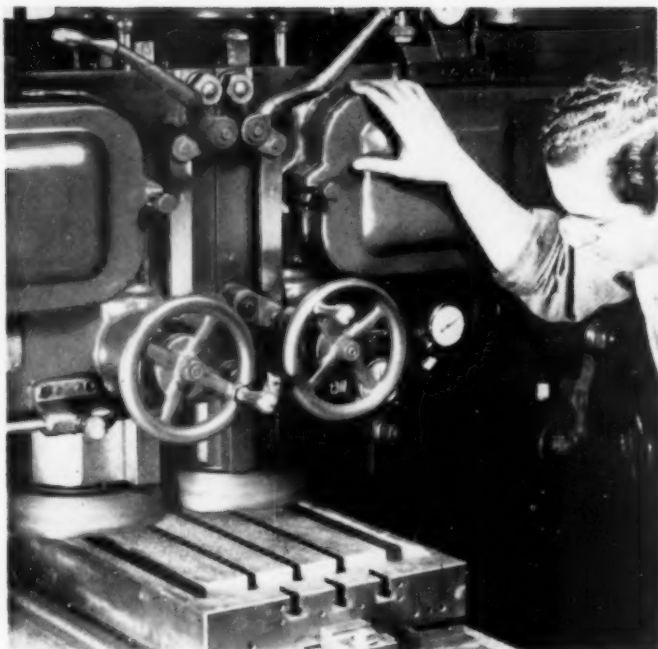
Finishing a CI milling machine table. Cutting speed 300 fpm, depth of cut 0.020 in. Feed per tooth 0.002 in.
